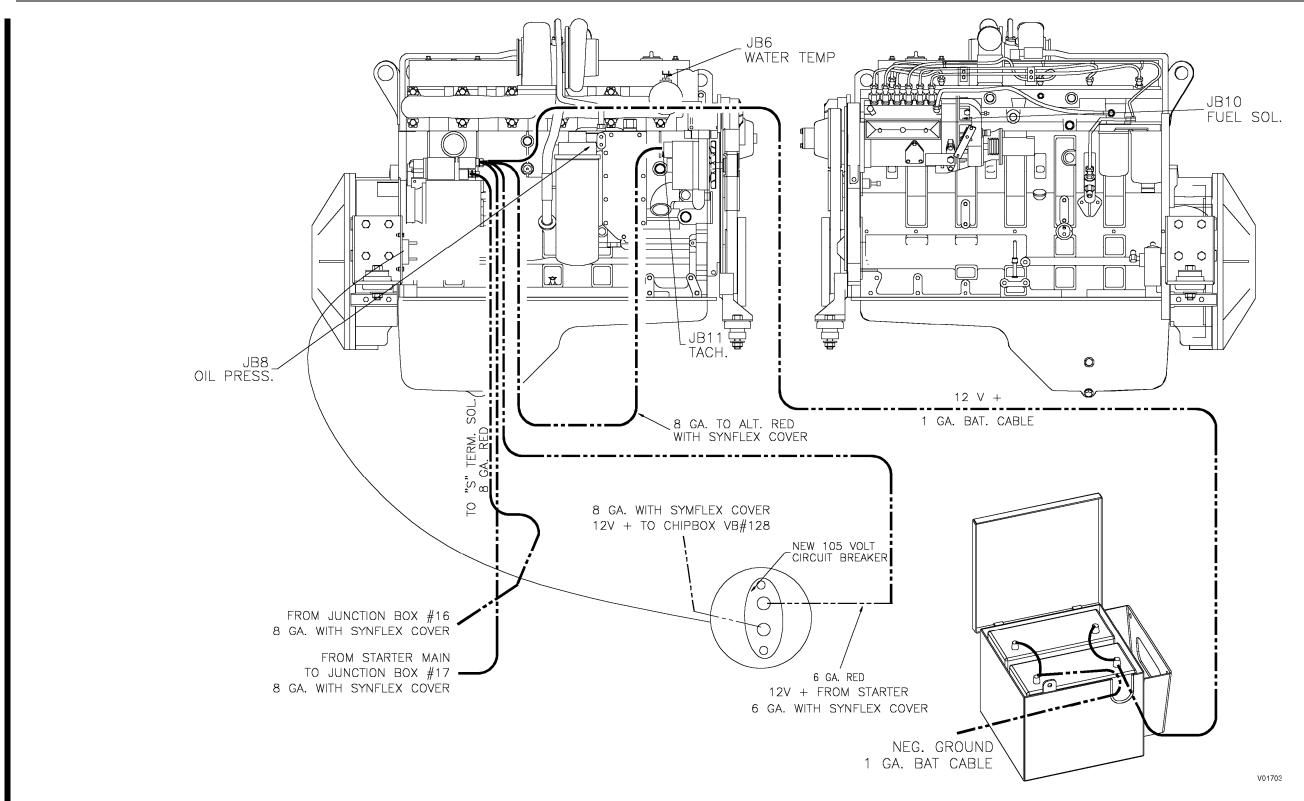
(Sheet 2). Chipper Engine Wiring Detail (Late)
